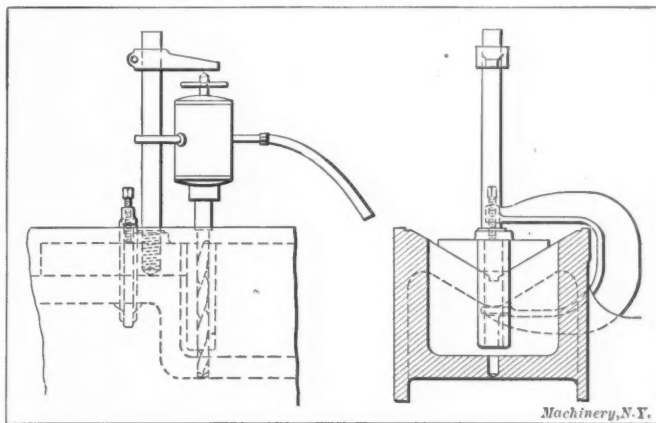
Combination Drill Jig and "Old Man" for Drilling Hole in Oil Pockets for Oiling Device. Jig insures Hole being drilled in Center of Way
